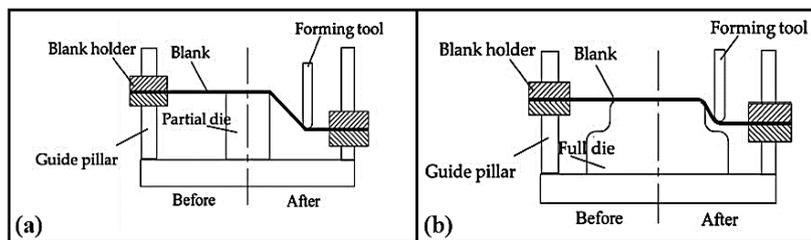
TPIF process with (a) Partial die (b) Full die [4].
